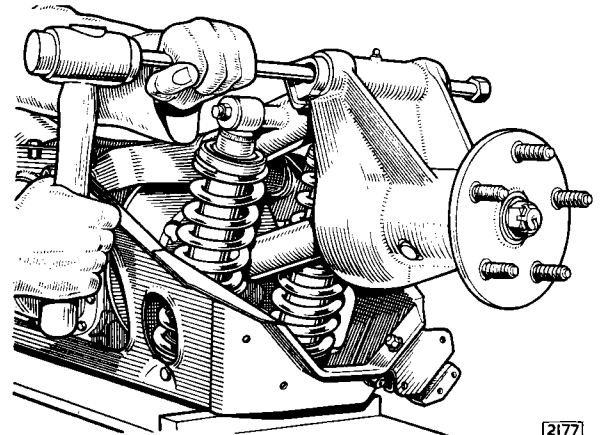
Drifting out the wishbone outer fulcrum shaft
